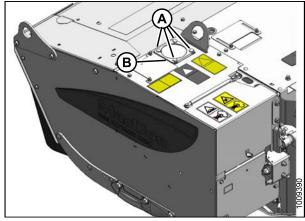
Header with Gearbox Plate in Position for Shipping
